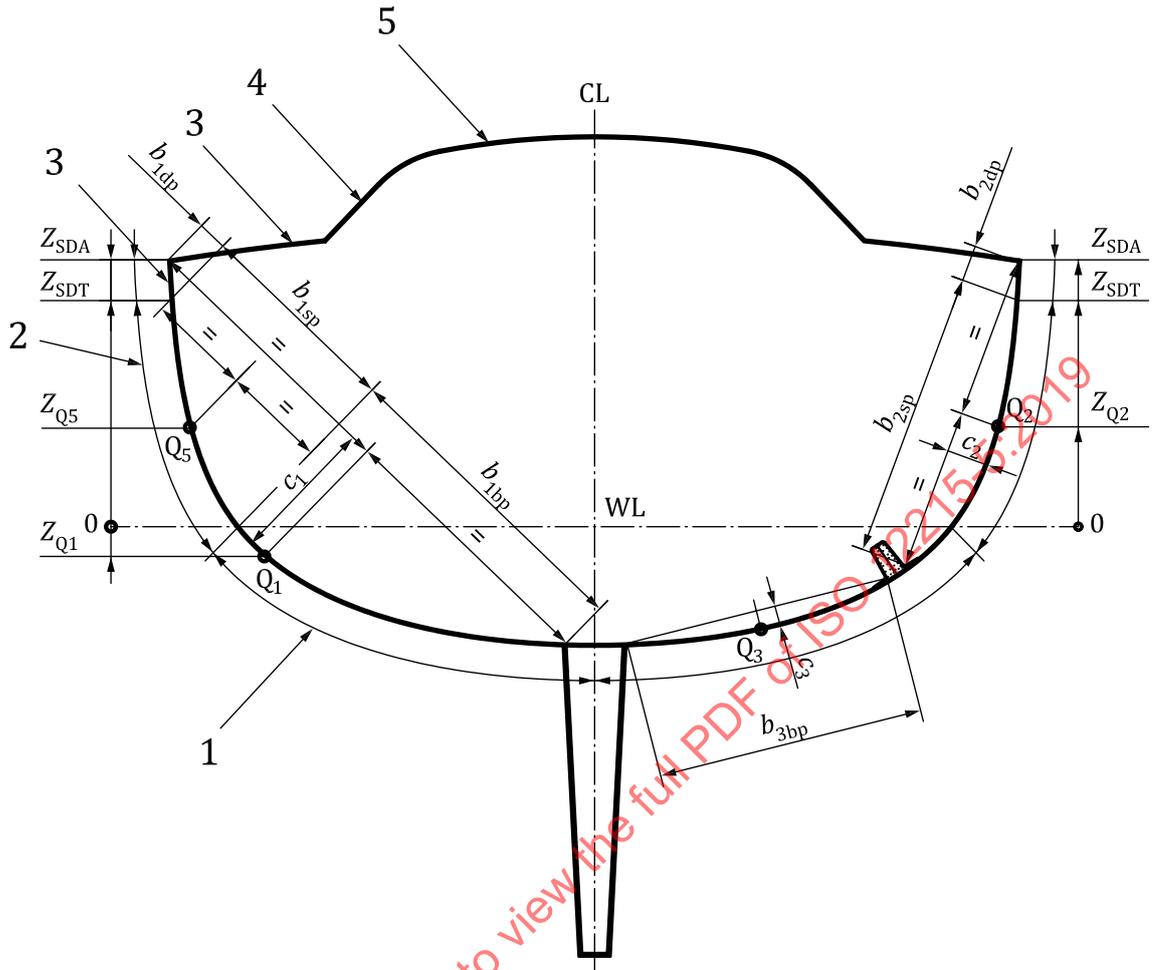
Examples of stiffener dimensions on a FRP craft
